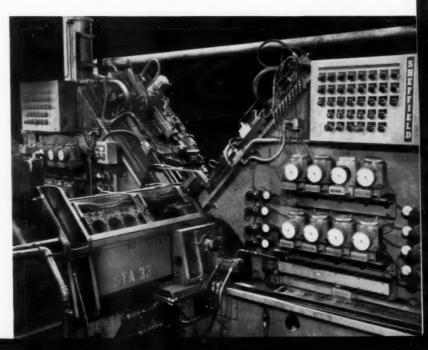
Finish-bored crank holes and the babbitt cam liners are inspected with this gaging unit. Blocks are classified by marking with various color paints.
